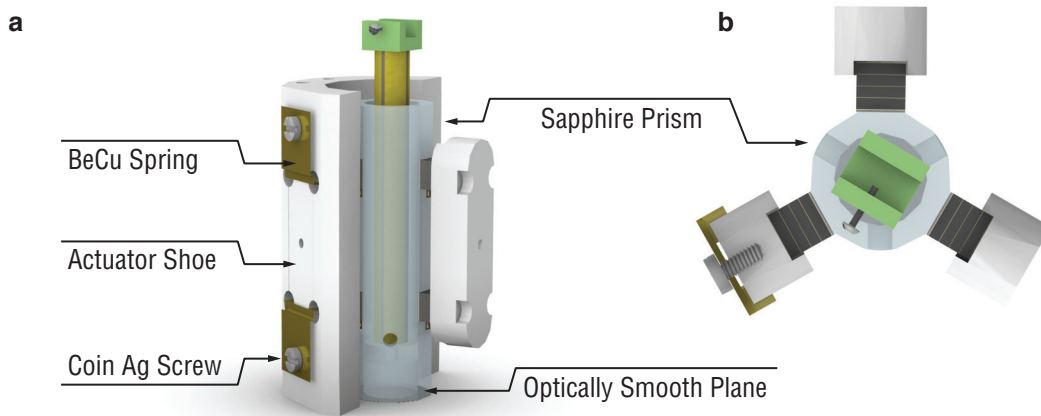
a: Side view of lower coarse motor section. b: Top view of same section, showing the three actuator assembly units situated 120° apart.
